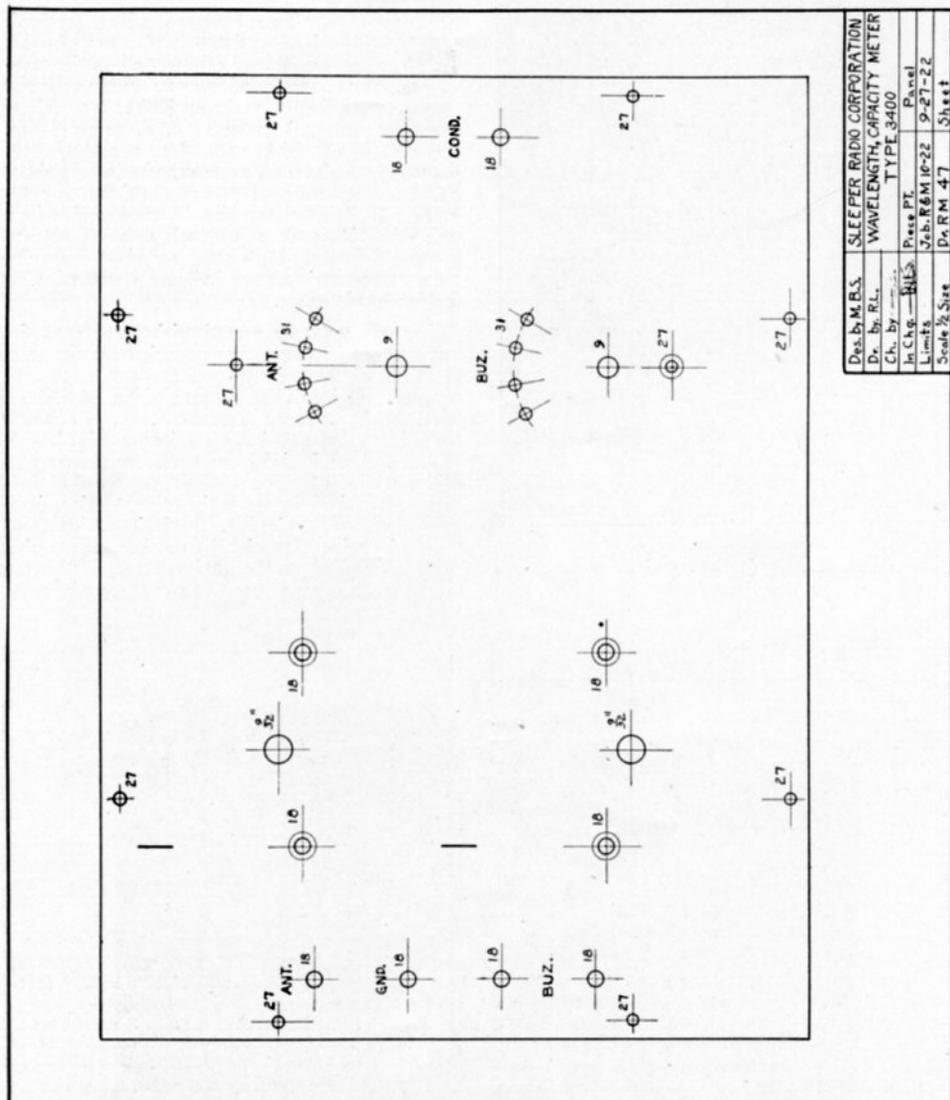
One-half scale drawing of the front panel showing the location of the holes.
